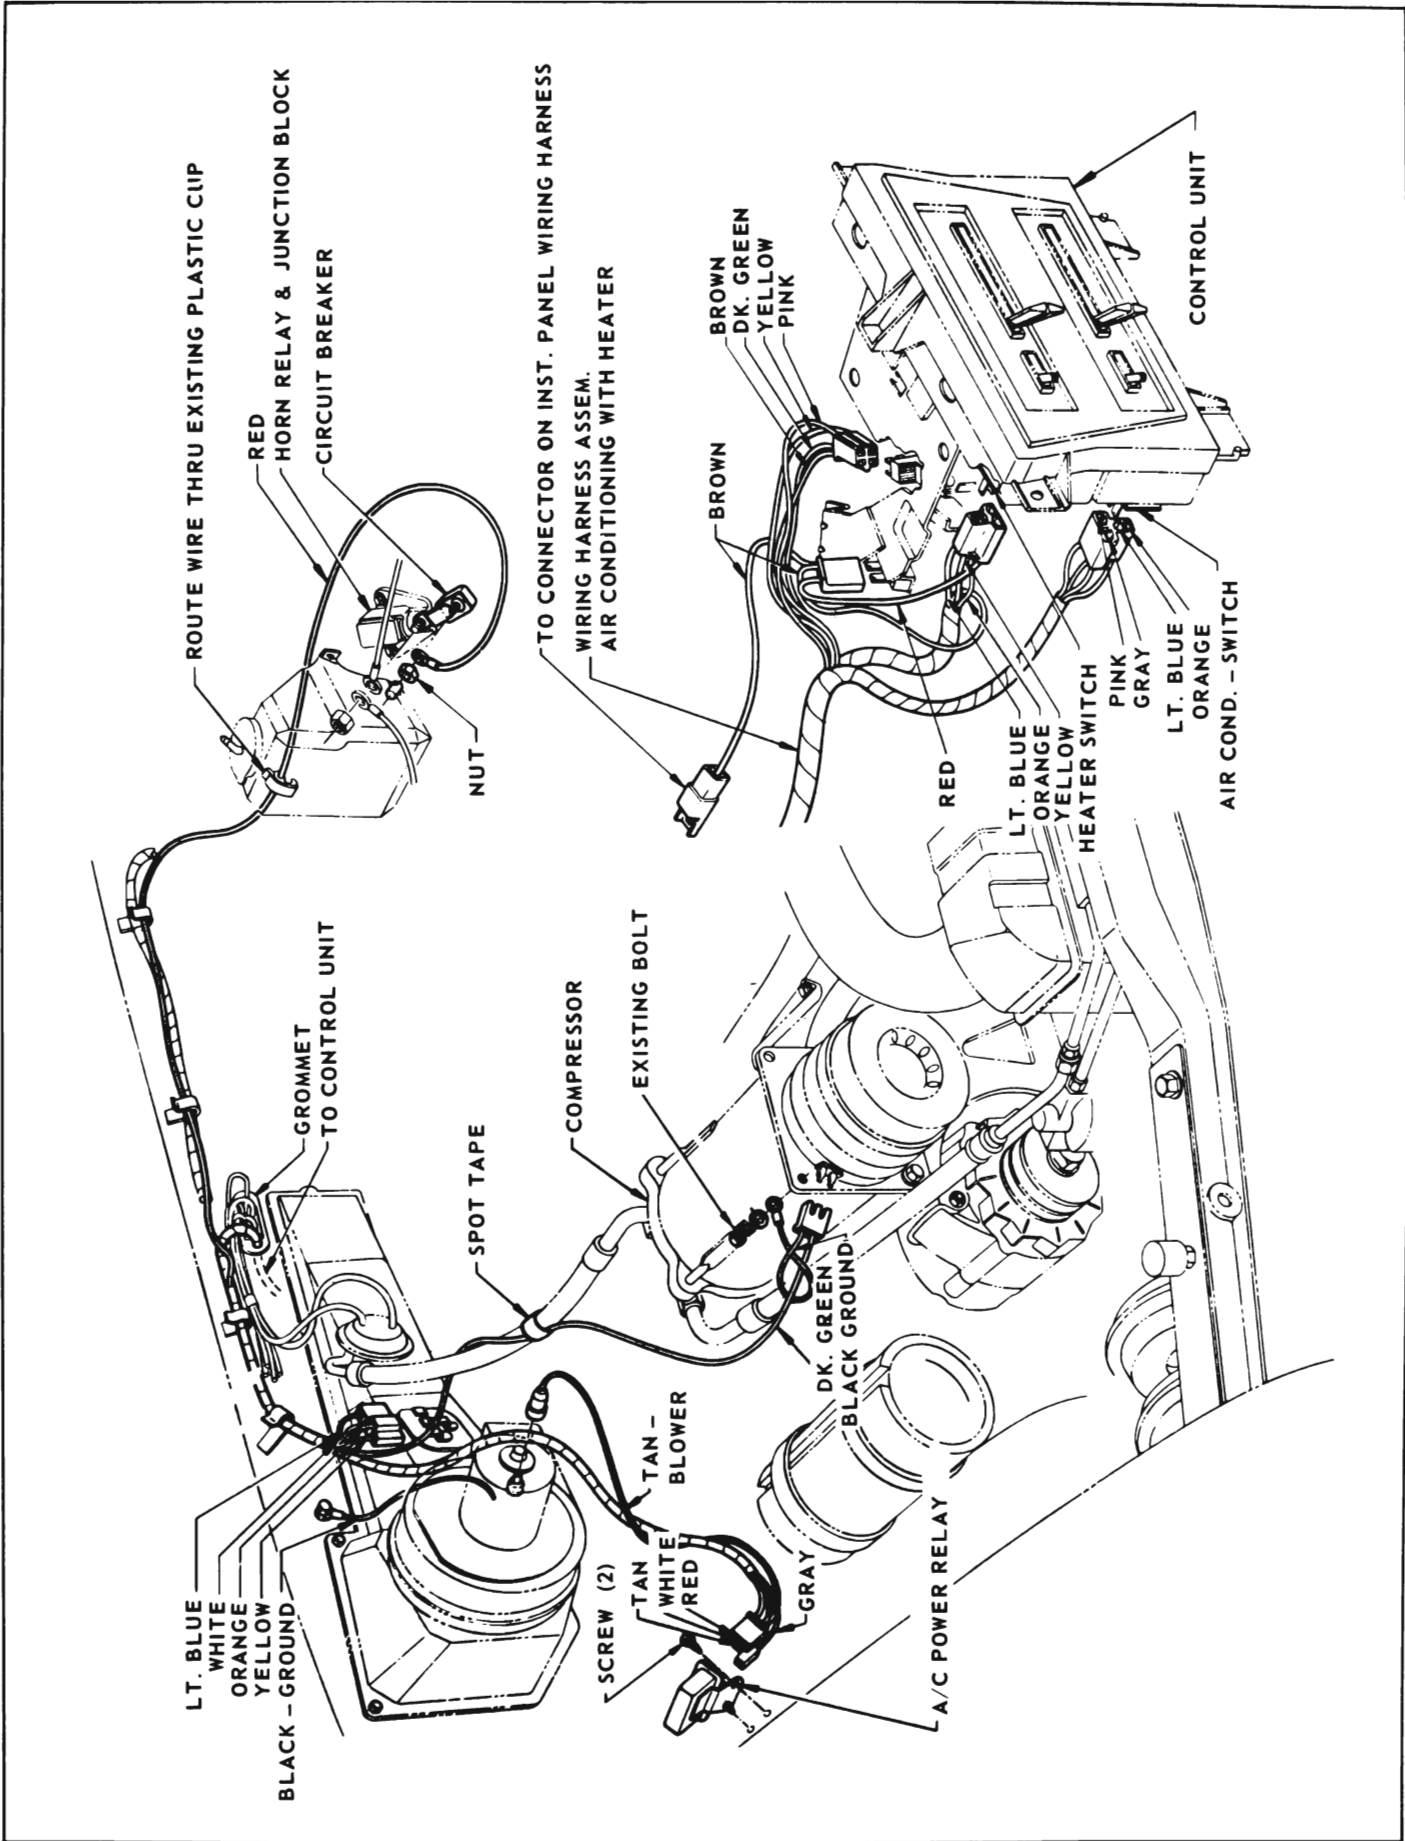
Air Conditioner Wiring Installation - 4700 Series
